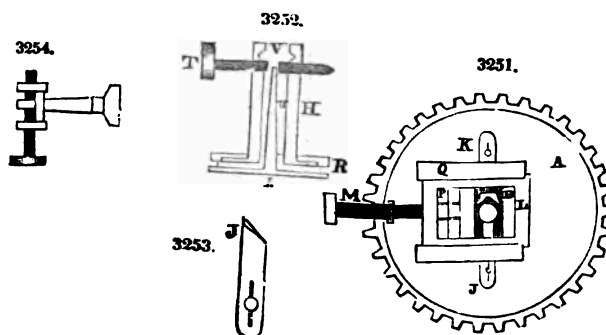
is a view of the face of the bevelled cog-wheel, carrying the dies, cutter and rest, &c.
